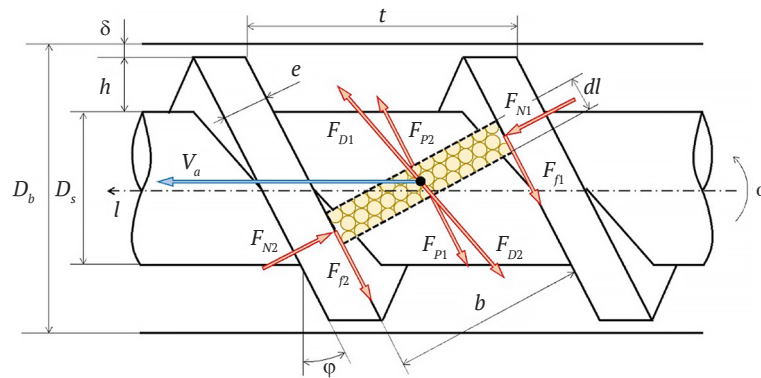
Design scheme of movement of solid feed components in the screw channel of the expander
